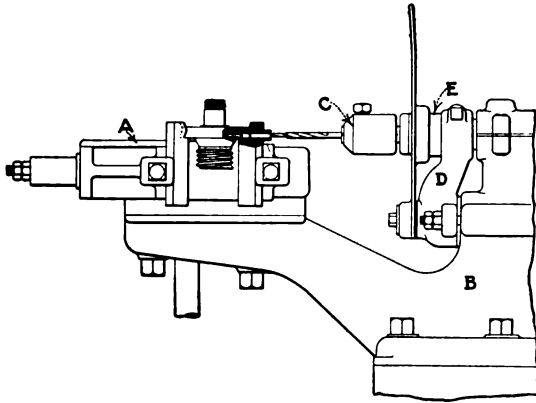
DETAIL OF DRILLING UNIT FOR PRESSED-CAST ALUMINUM BODIES
